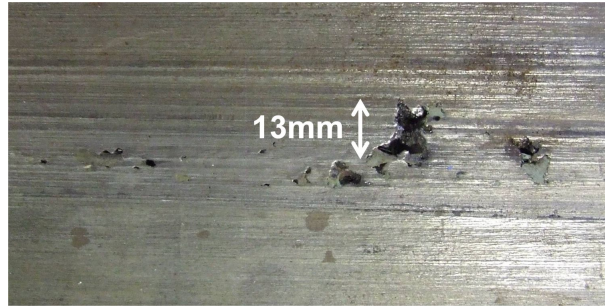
An example of a defect within the bulk of a steel billet that has been cut open for inspection. This 13mm void must have been formed during the casting process, as the sample has not undergone any other processes that could have caused such a void to occur.
